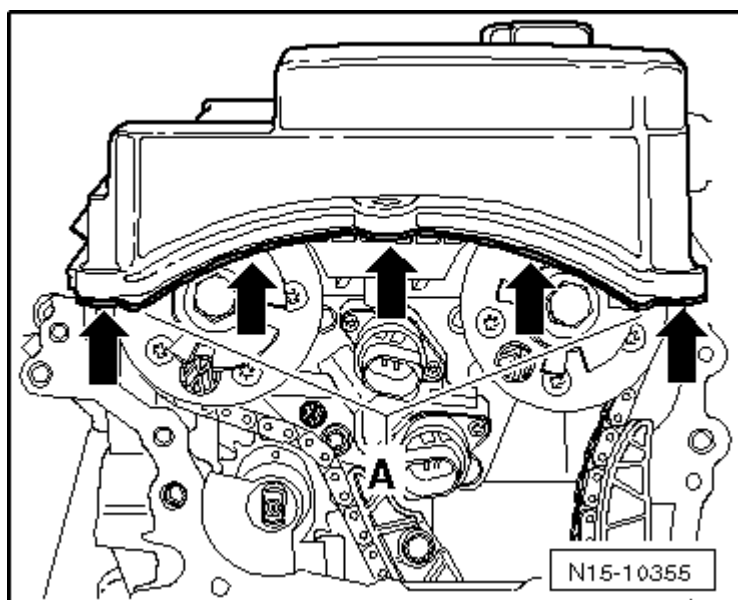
Ensuring Cylinder Head Cover Seal Is Seated Correctly In Cover
